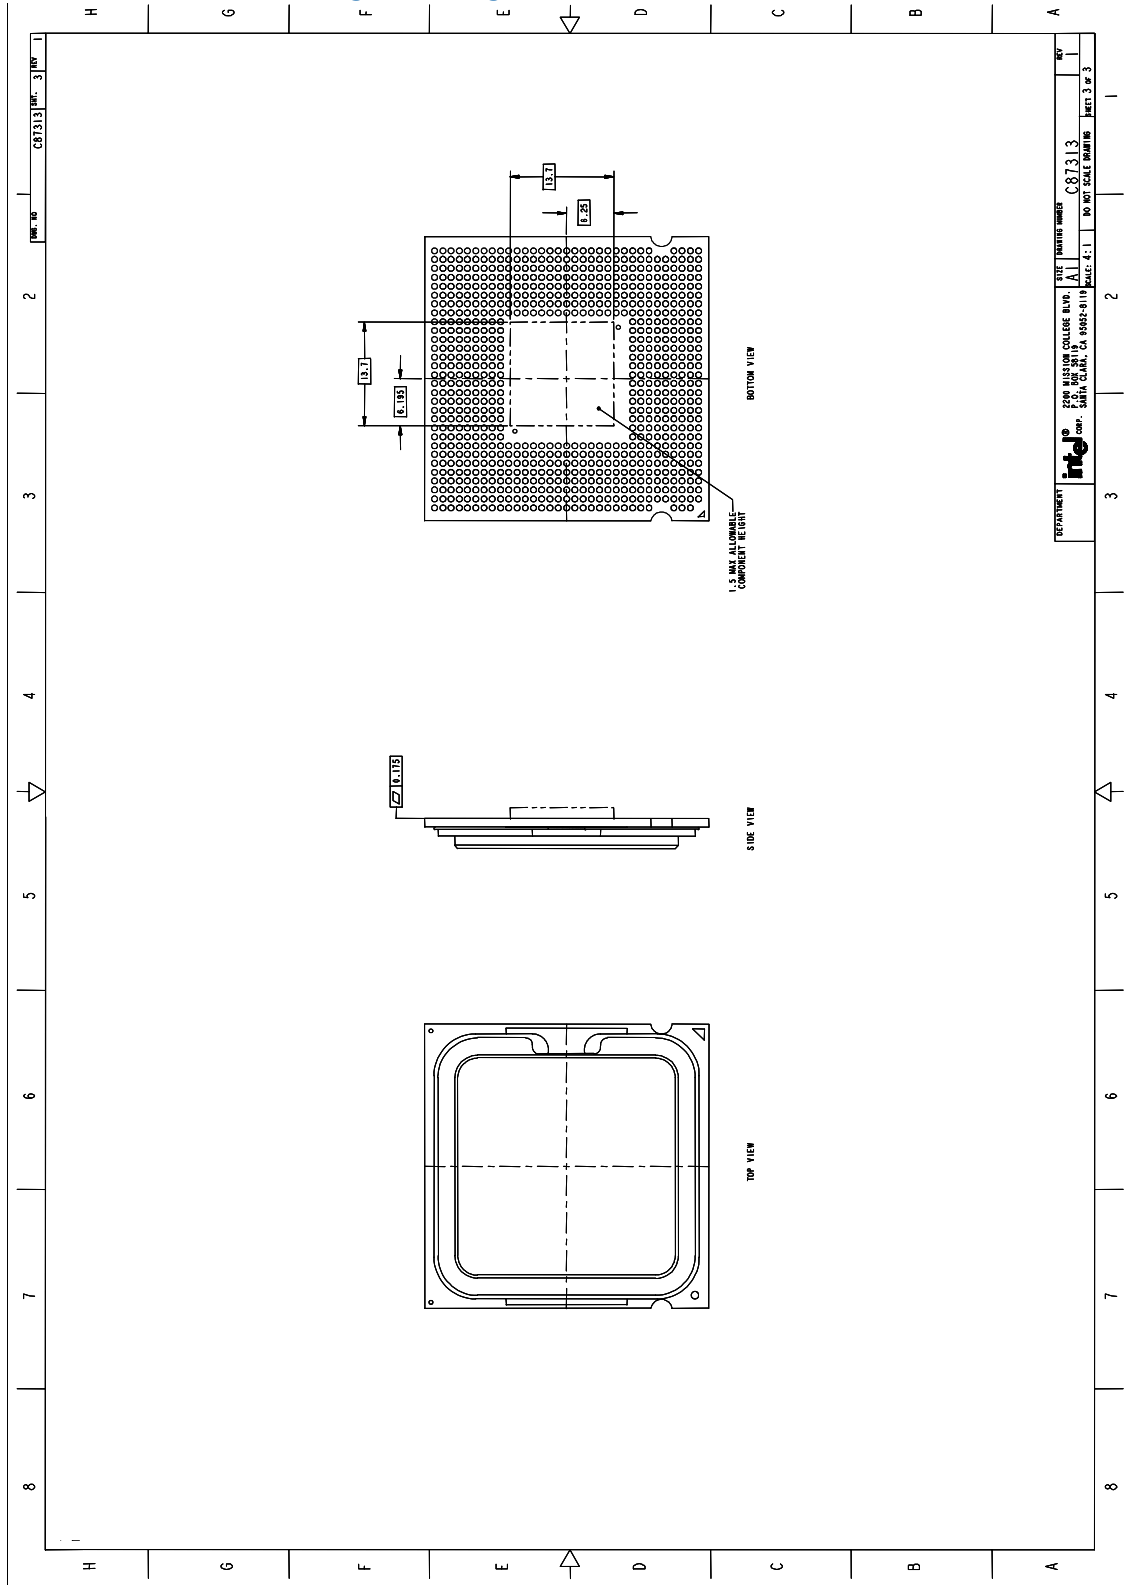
Processor Package Drawing (Sheet 2 of 3)
